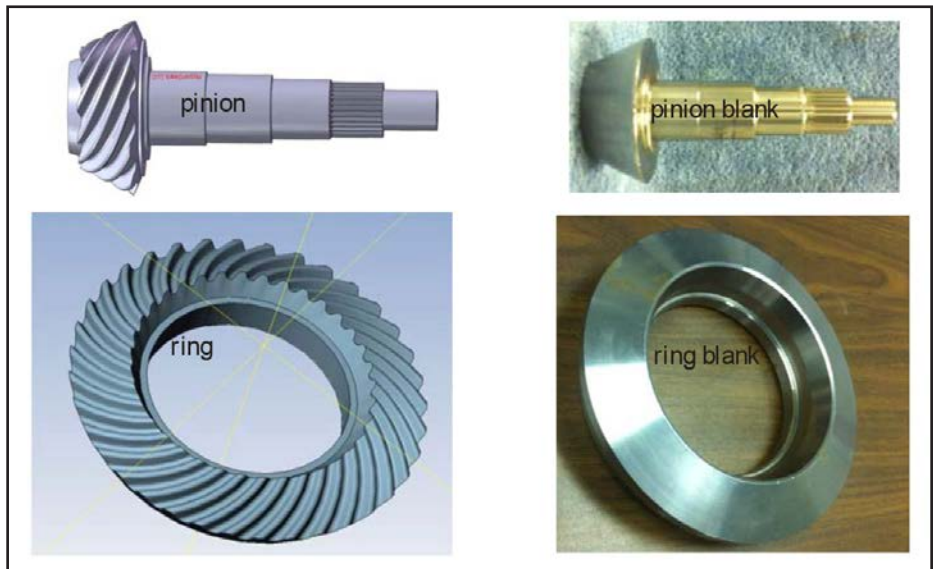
CAD models of pinion and ring gear, along with blanks prior to gear teeth addition.
